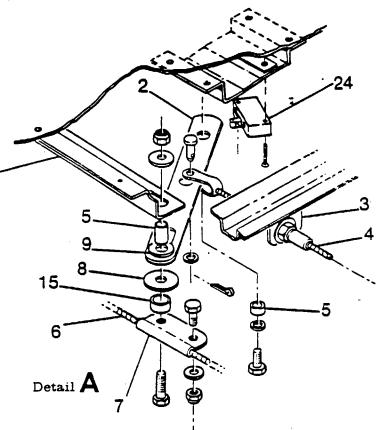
Flap Follow-Up Control and Position Indicator (Sheet 1 of 2)
